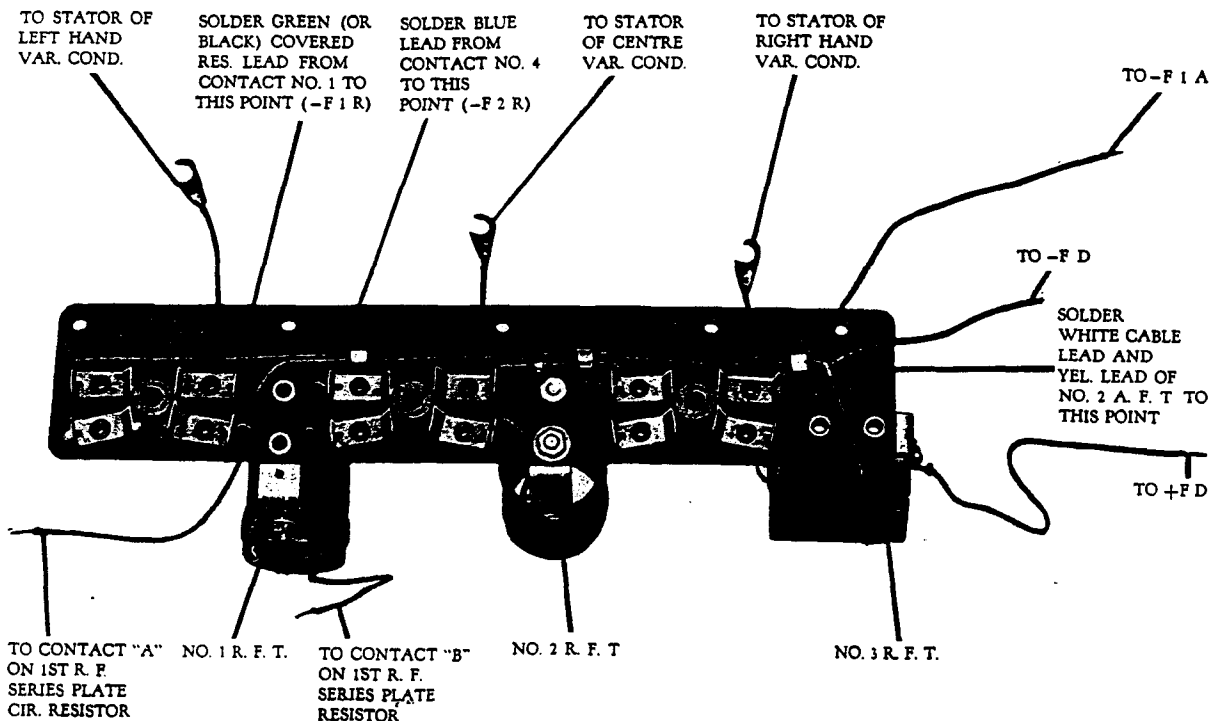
VIEW OF R. F. AMPLIFIER ASSEMBLY, SHOWING WHERE EACH LEAD IS TO BE CONNECTED.
